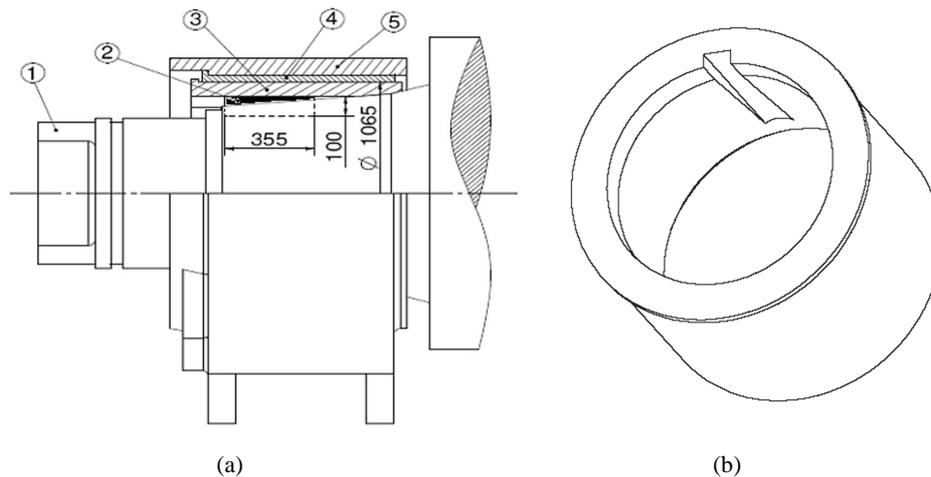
(a) Key-type bearing assembly: 1 – roll; 2 – key; 3 – conical sleeve; 4 – bearing bushing; 5 – bearing housing; (b) conical sleeve with a key groove.
